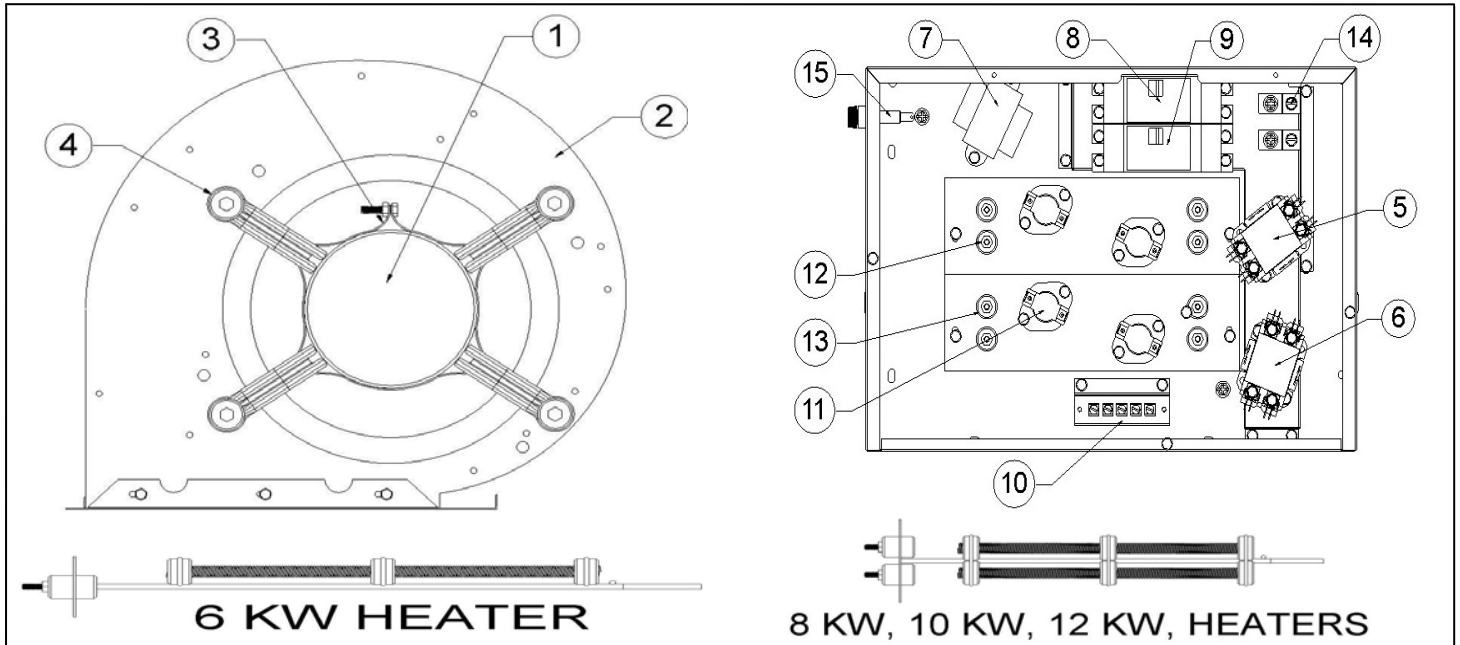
Replacement Parts Item Identification for Electric Heat Models with a 1/2 HP Constant Torque Blower Motor
